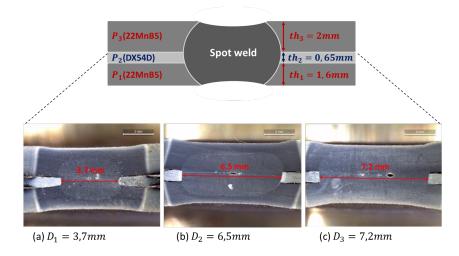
Spot welds qualities according to the nugget size
